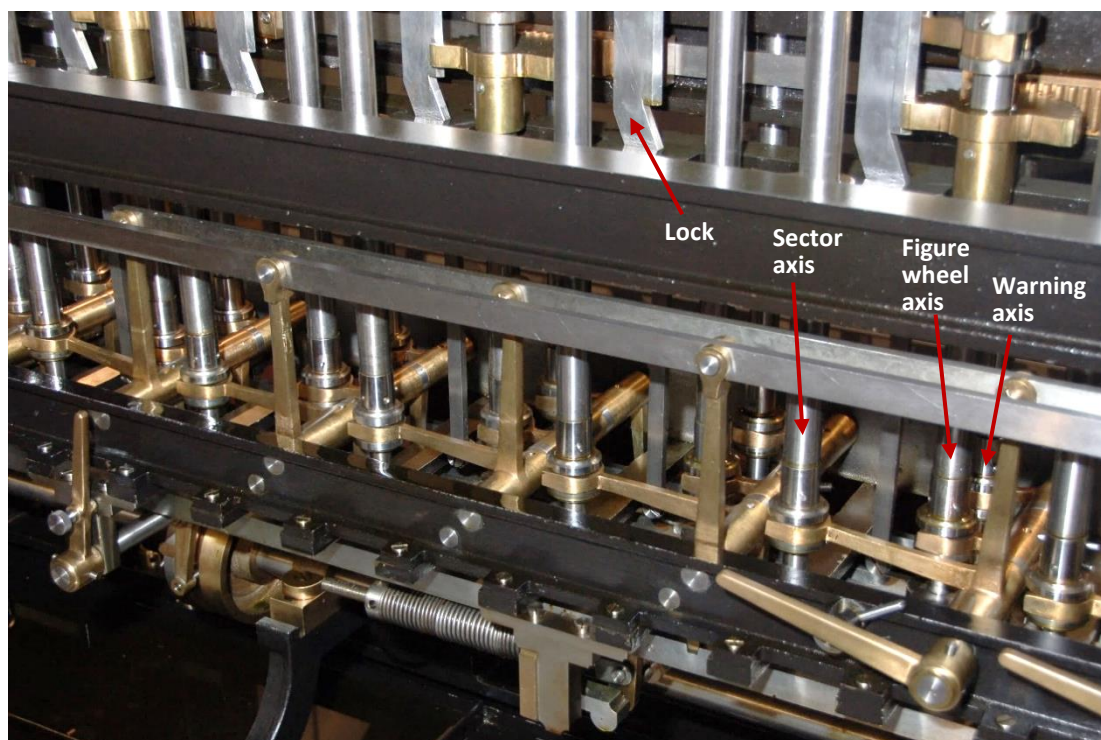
Bell cranks for locks, sector, figure wheel, and warning axes (view from front of Engine).
